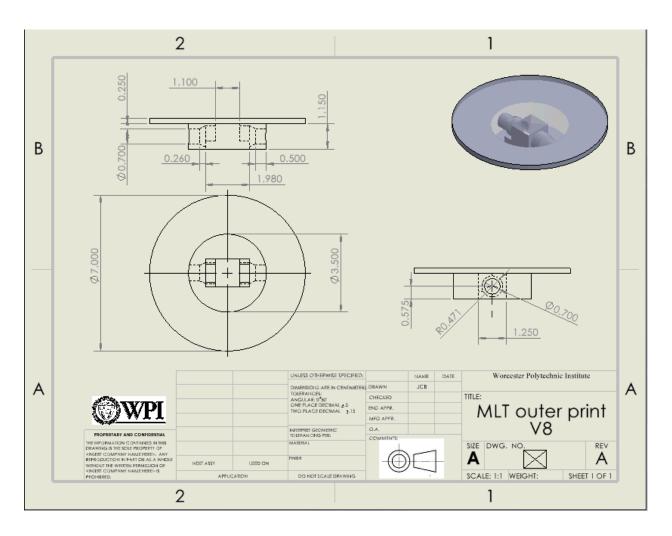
CAD Drawing schematic for the final design of the top half of the cap.
